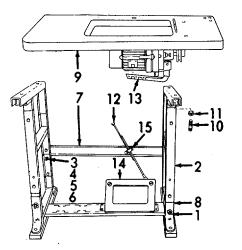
Clothing Sewing Machine Table, Assembly.
